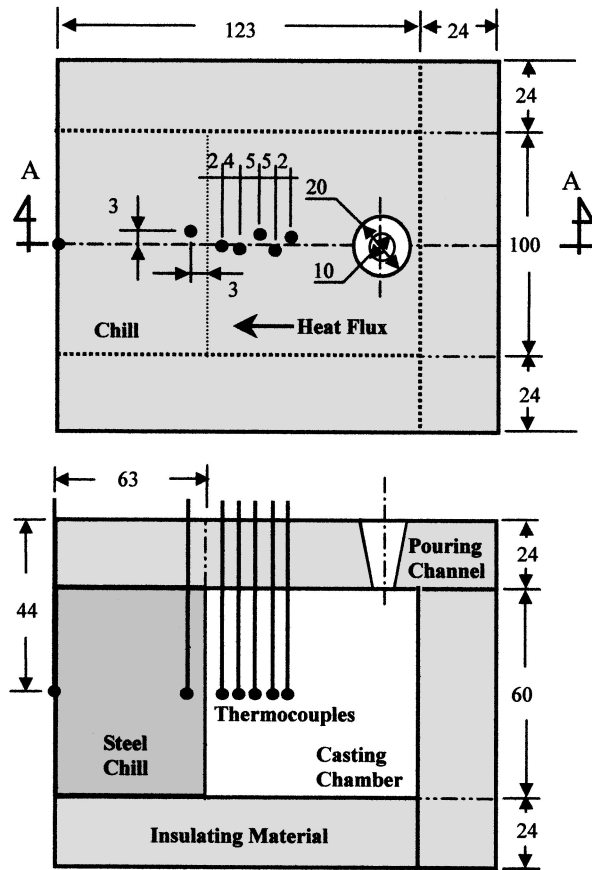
Casting arrangement and position of thermocouples in mold wall and metal (mm).
